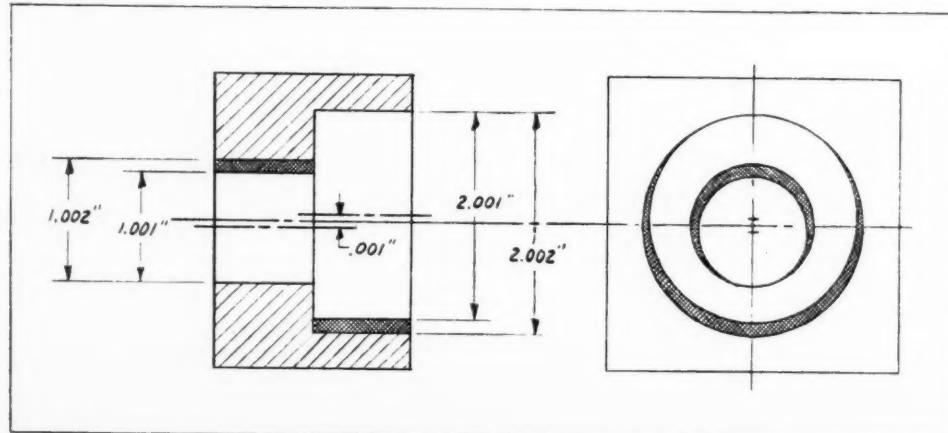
The shaded portion of this drawing indicates the additional manufacturing tolerances available with composite dimensioning. The result of this technique is higher production, fewer rejected parts and simplified inspection
